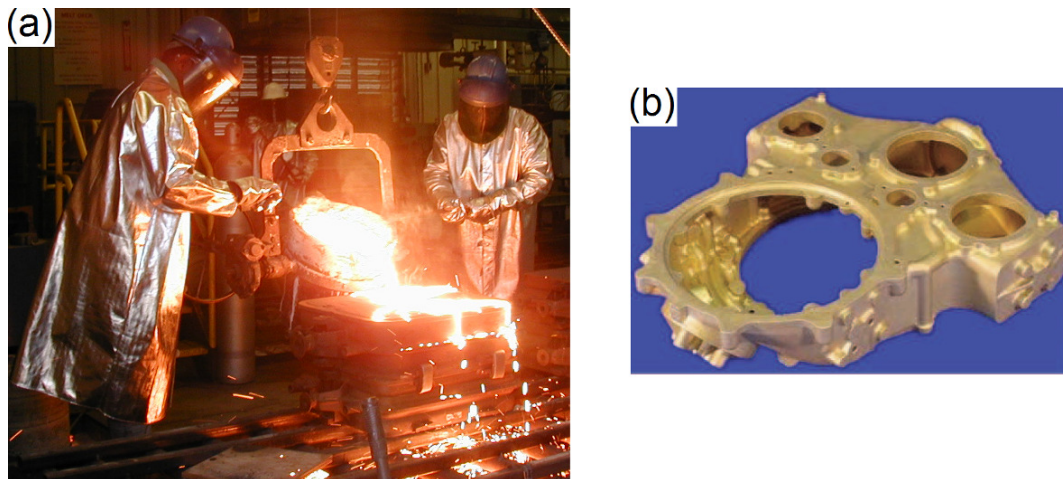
Casting examples: (a) molten metal being poured into a mould [16]; (b) cast magnesium gearbox housing [9].
